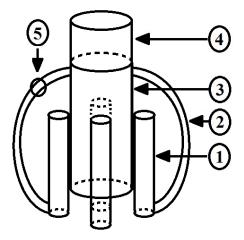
Post driver with four small motors. 1) Electric Motor, 2) handles, 3) mounting hole for the post, 4) battery Pack, 5) emergency stop button.
